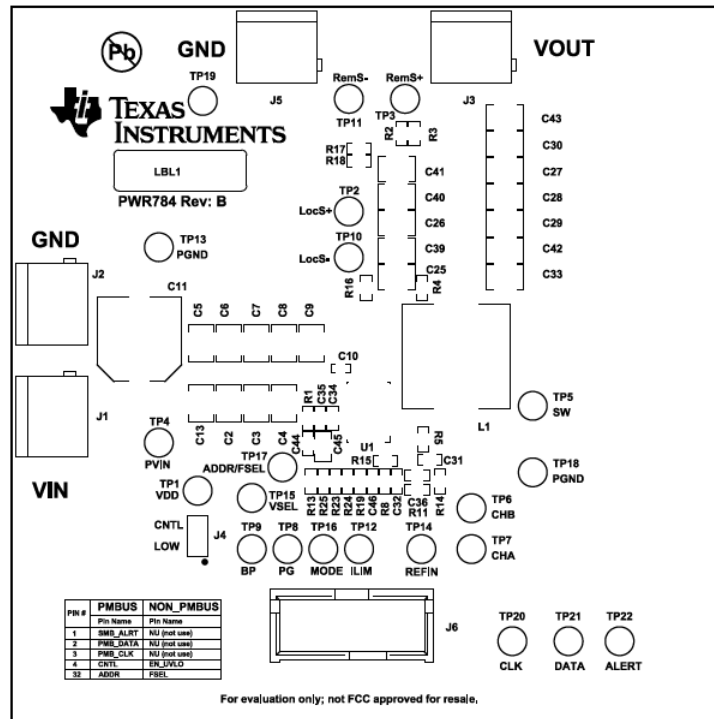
PWR-784EVM Top Layer Assembly Drawing (Top View)
